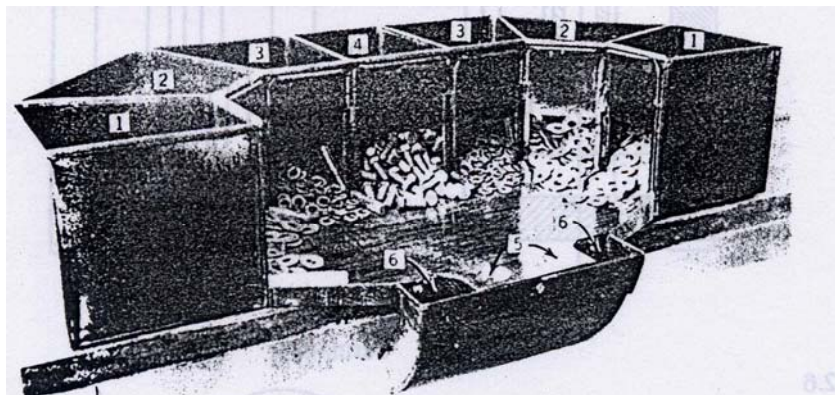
Bins, fixture, and chute for bolt and washer assembly.
